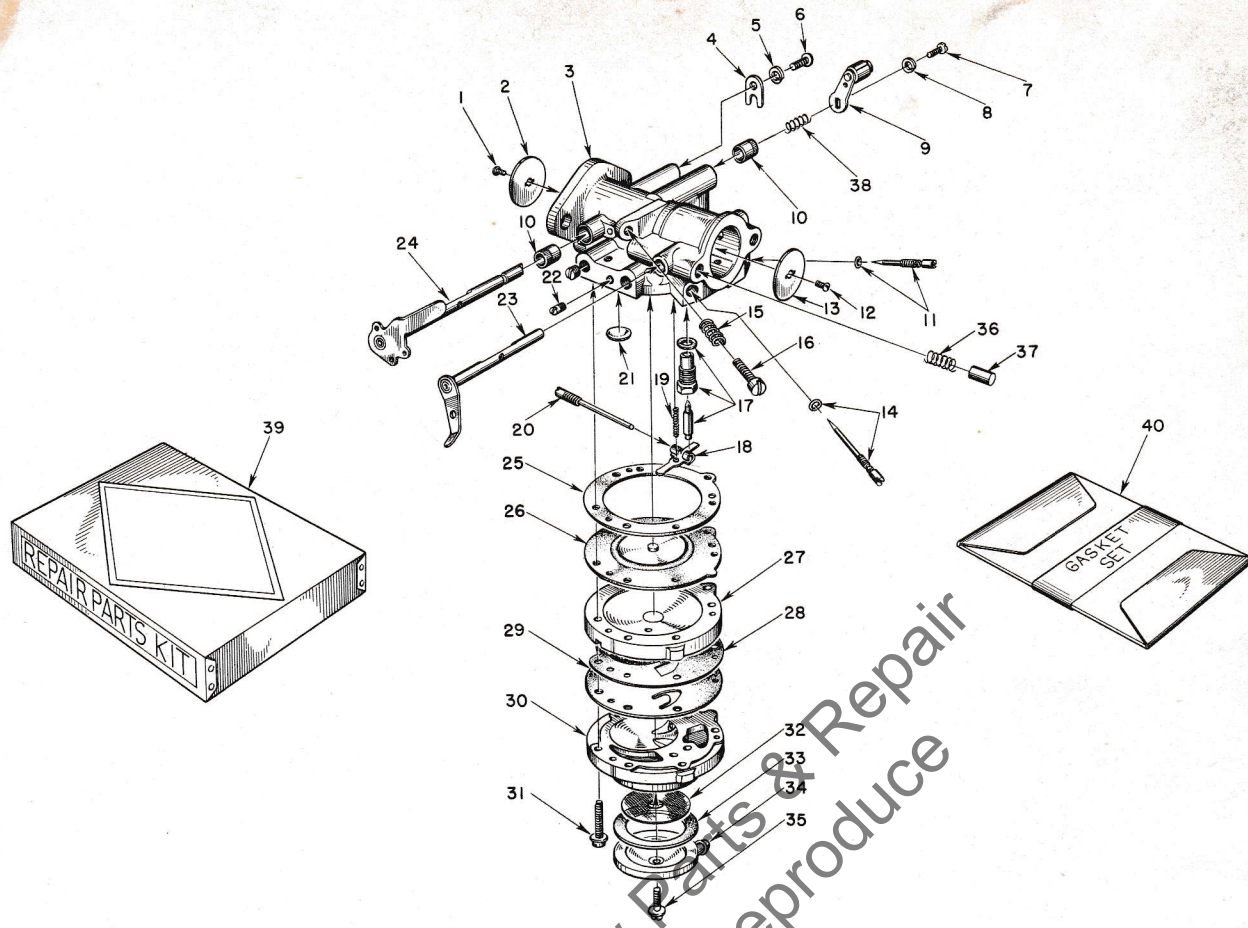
TILLOTSON HL-27B CARBURETOR PARTS
